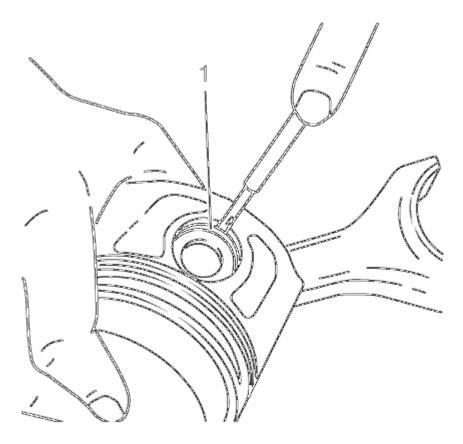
Detaching Piston From Connecting Rod Courtesy of GENERAL MOTORS COMPANY
